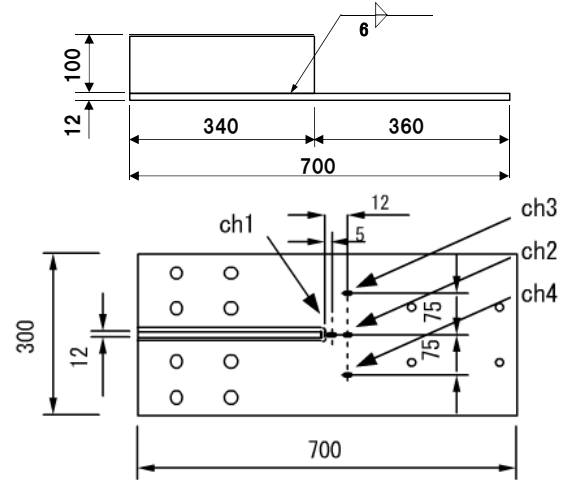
Out-of-plane gusset welded joint specimen (unit:mm).
